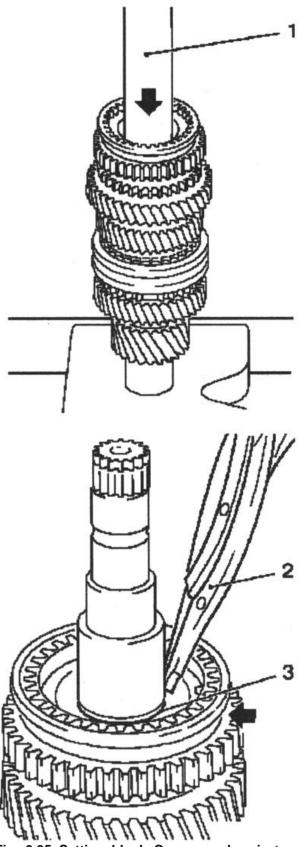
Setting block Corps syn-hronizatora on main Shaft:
